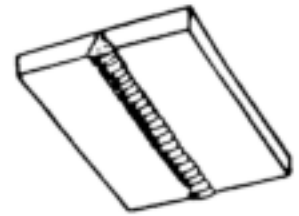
PLATES AND AXIS OF WELD HORIZONTAL
